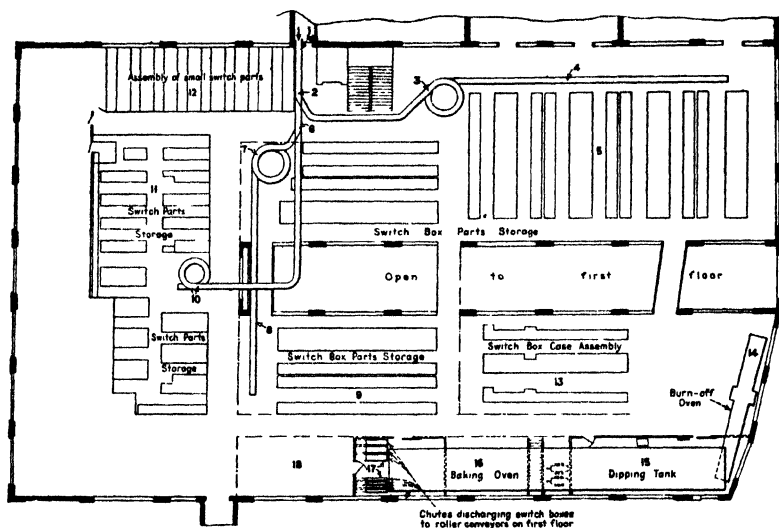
Layout of conveyors, storerooms and manufacturing equipment on second floor.
